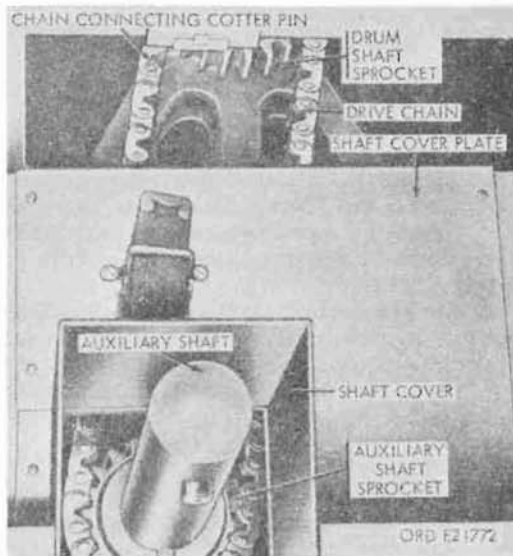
V-17A/MTQ rear winch lower shaft cover and plate, and auxiliary drive chain
